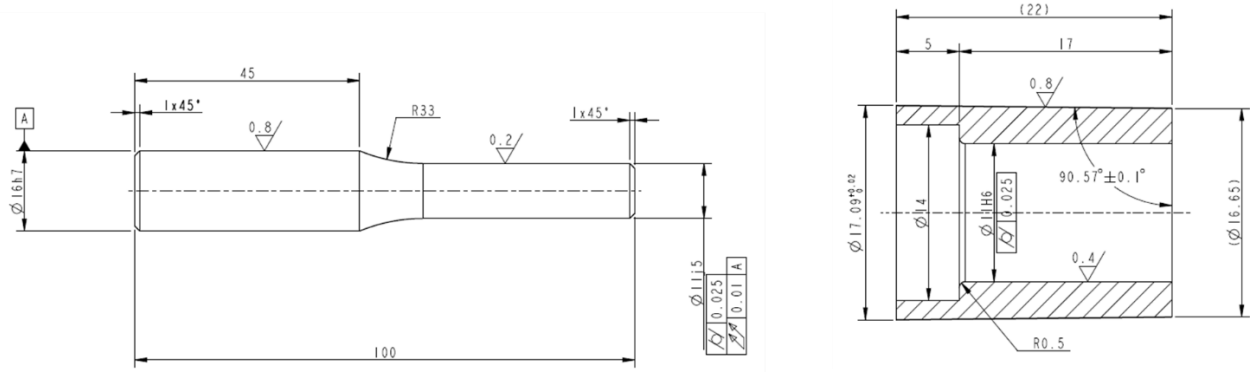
Notched specimen assembly (not in scale, all dimensions in mm)
